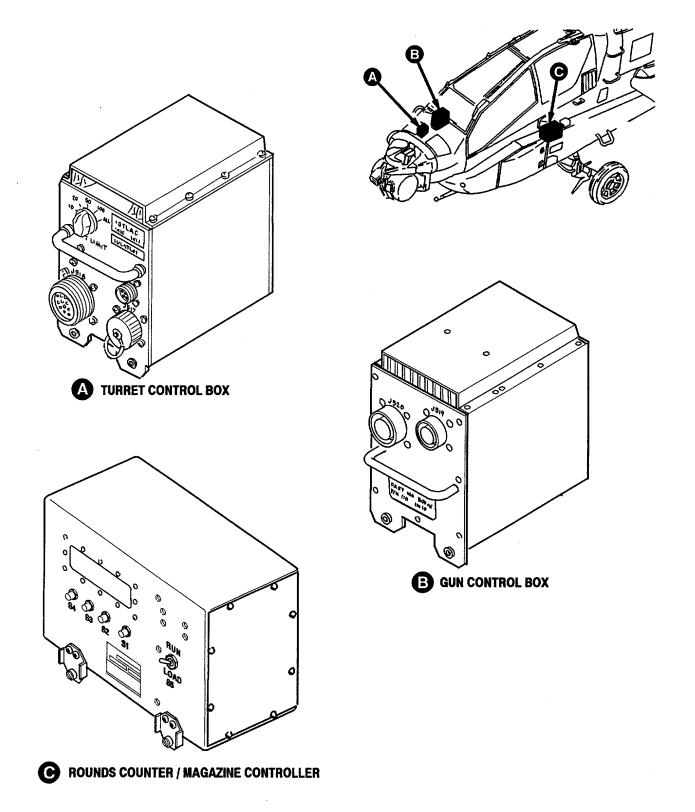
Area Weapon System Component Location (Sheet 1 of 4)
